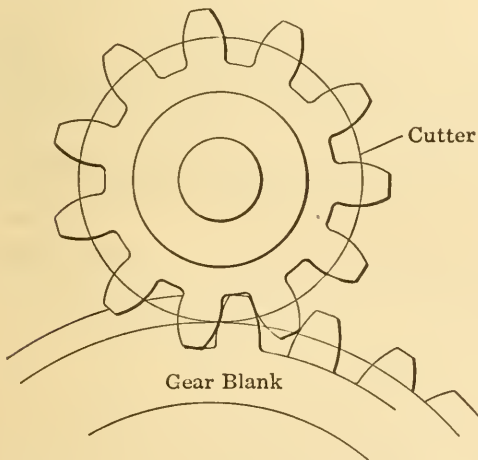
ACTION OF THE FELLOWS' GEAR CUTTER.
